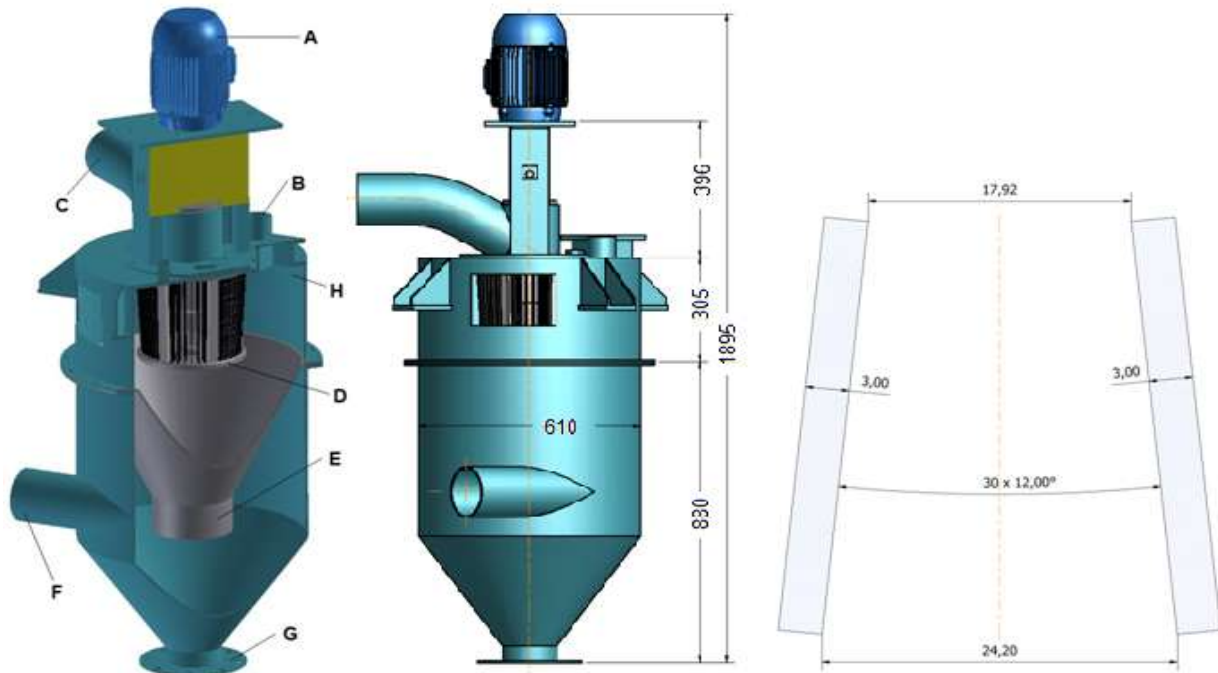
Outline and blade arrangement dimensions in mm & main parts: A- motor; B- feed inlet; C- fine particles outlet; D- rotor cage; E- inner cone; F- lower chamber; G- coarse particle outlet; H- upper chamber
